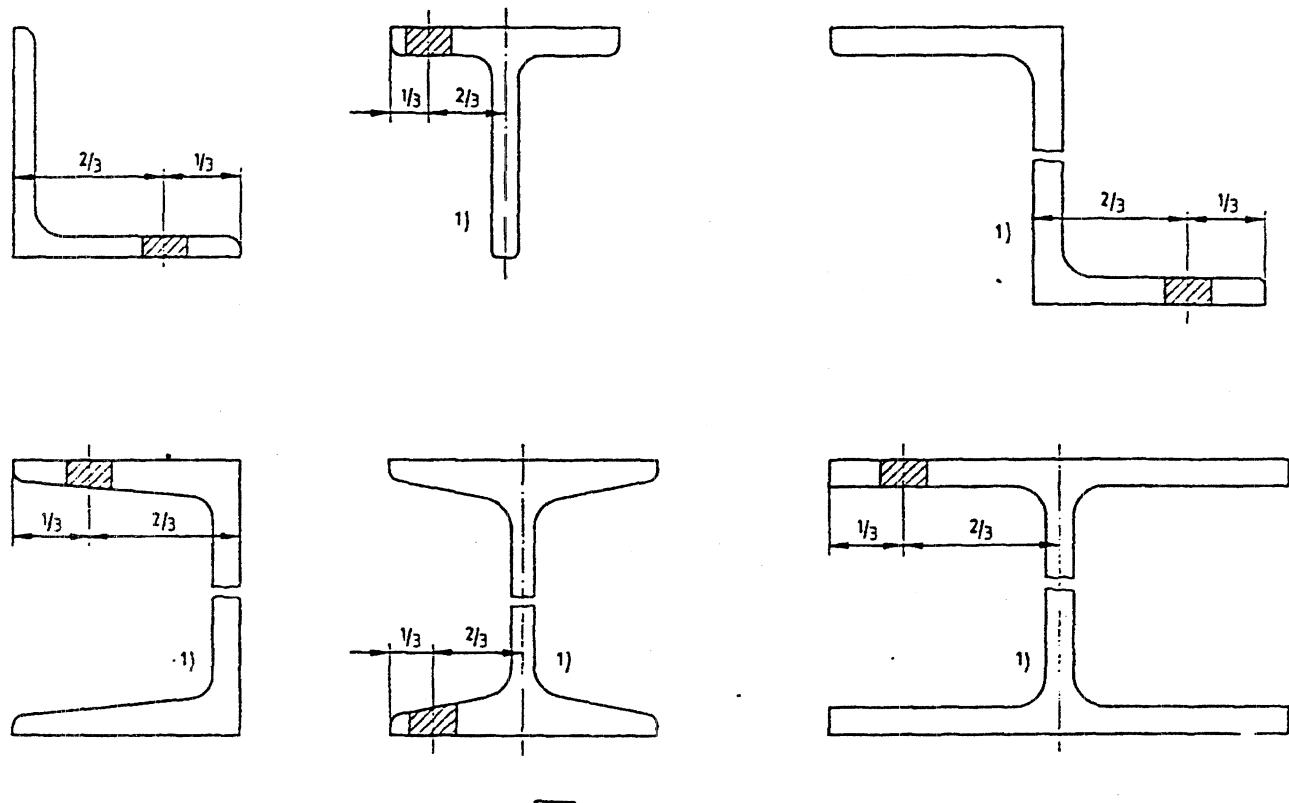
Position of test pieces for beams, channels, angles, T sections and Z sections
